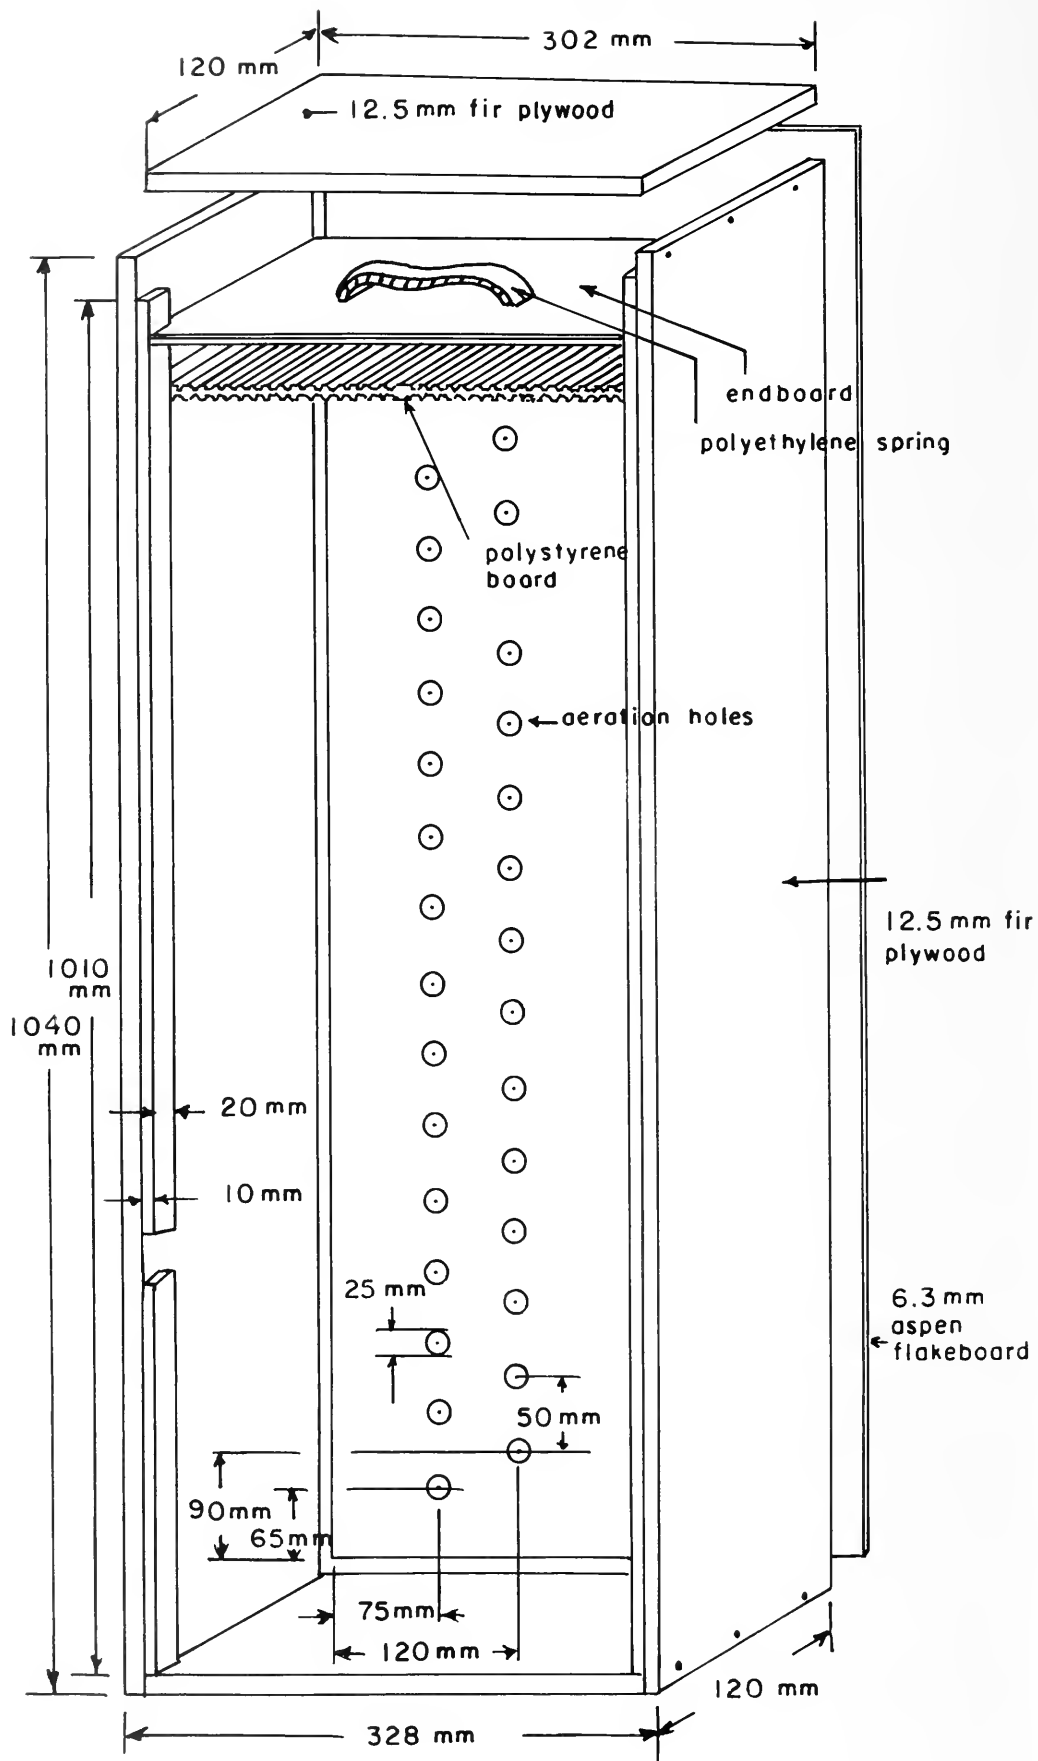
Plan for a hive made with 30-tunnel molded polystyrene grooved boards.
